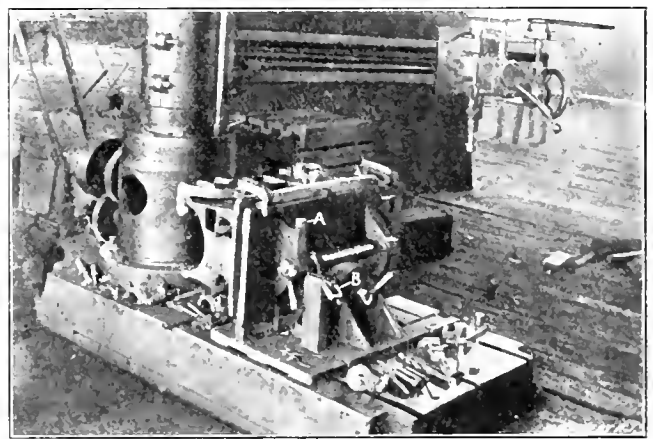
Drilling and Reaming Side Holes in Small Bed, which is mounted on a Universal Fixture
